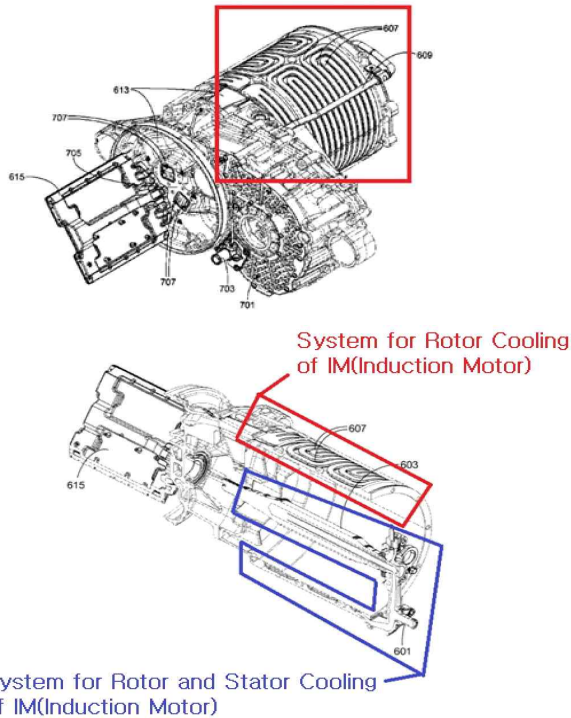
TESLA EV stator and rotor cooling patent US9030063^[21].
